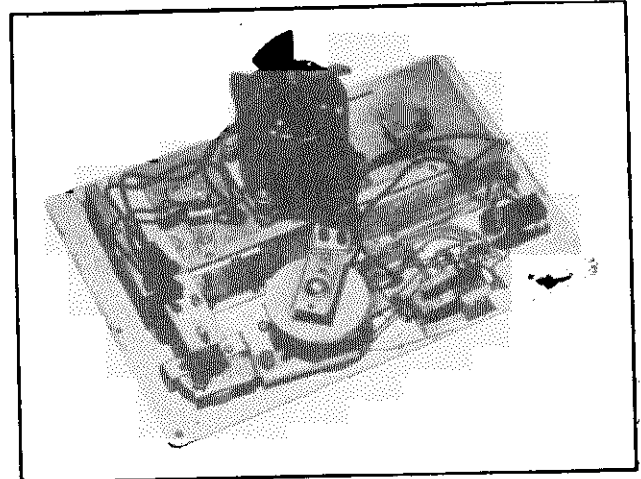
MECHANICAL CHASSIS, BOTTOM VIEW
